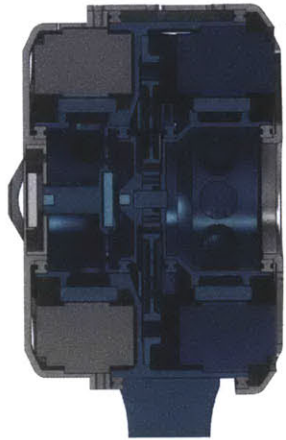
The shoulder motor rotates both the humerus and the stator of the elbow motor. Components that move when the shoulder motor is actuated are highlighted in blue.
